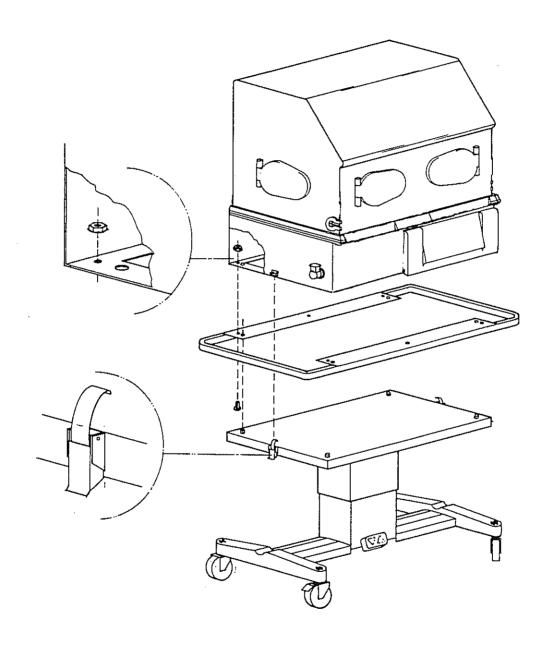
ASSEMBLY, INCUBATOR MOUNTED ON VHA CABINET STAND
